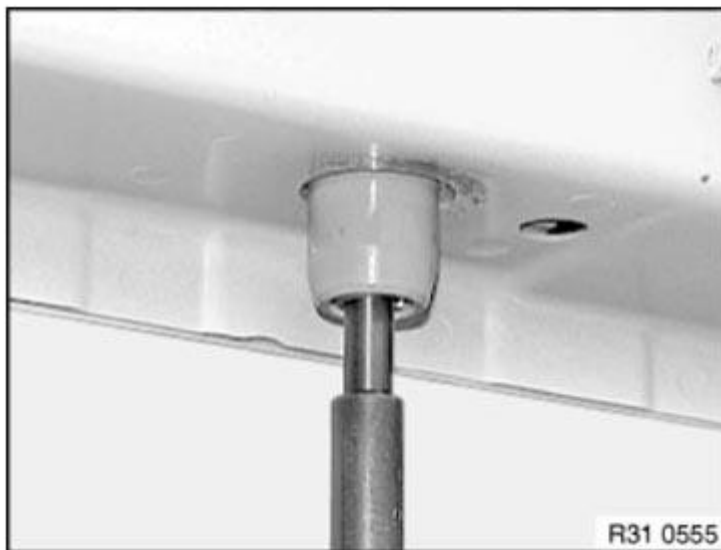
Creating Locating Thread For Helicoil Thread Insert
